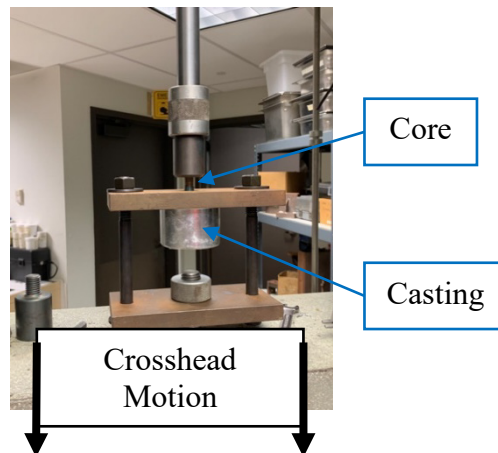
Image of the fixture for measuring the ejection force. The top and bottom of the fixture could pivot by a few degrees to correct for misalignment.
